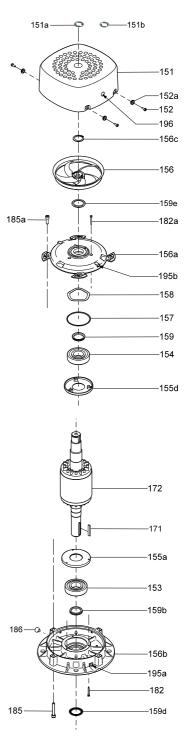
Detail from fig. 24, exploded view of the MGE-F
